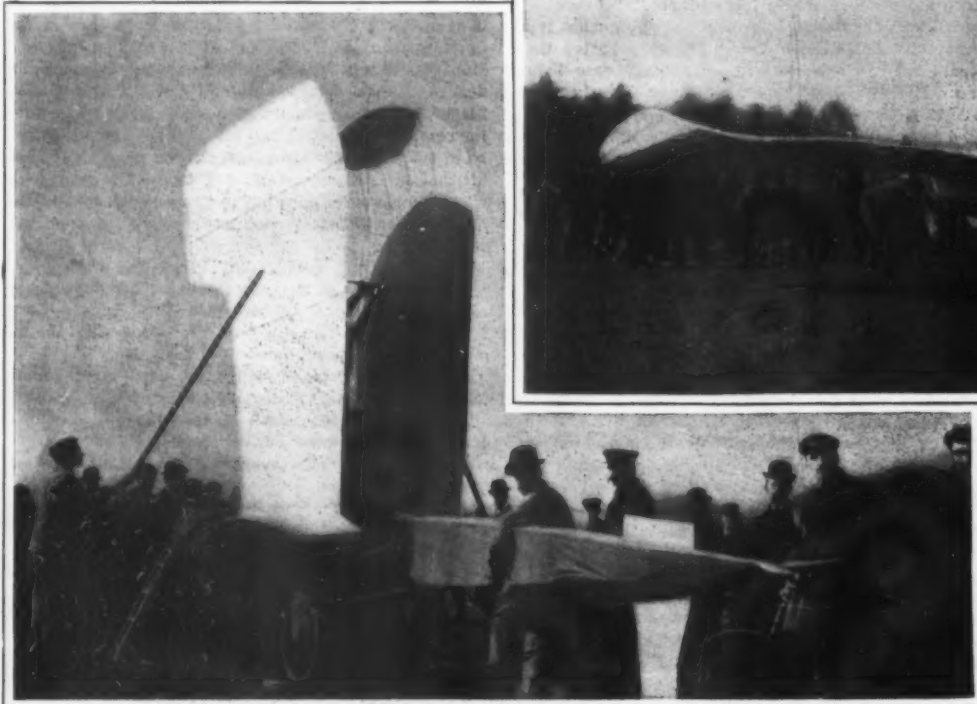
ATTACHING THE PLANES TO THE BODY OF BLERIOT'S MONOPLANE FLYING MACHINE.
